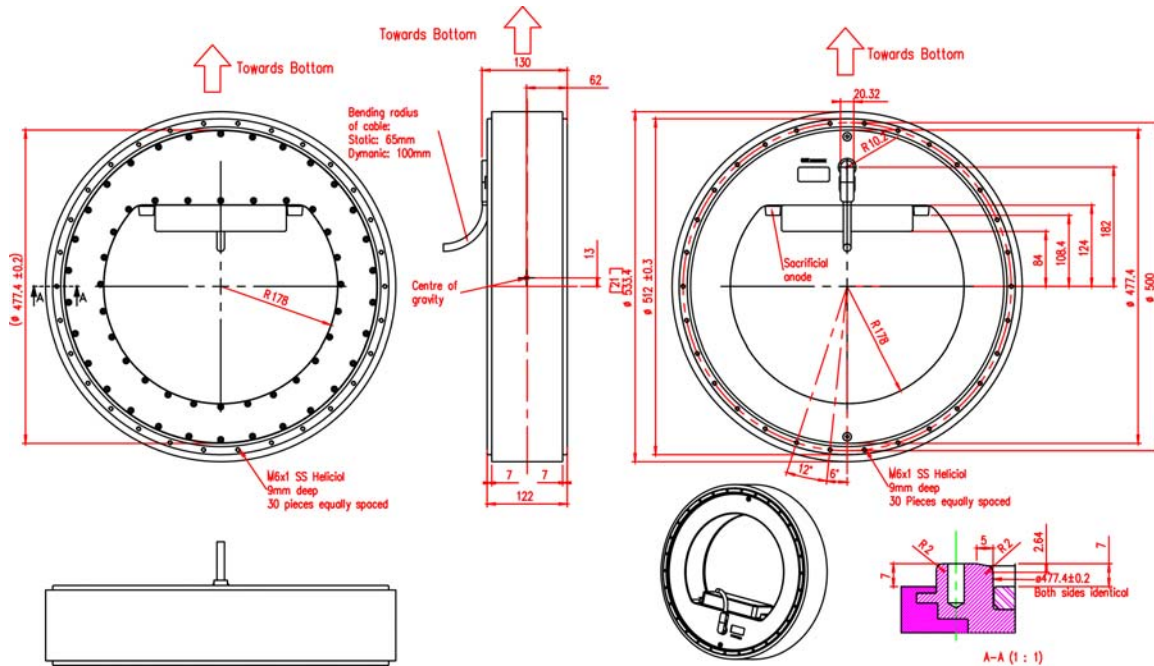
Outline Dimensions of EM 7204 Receiver Unit
